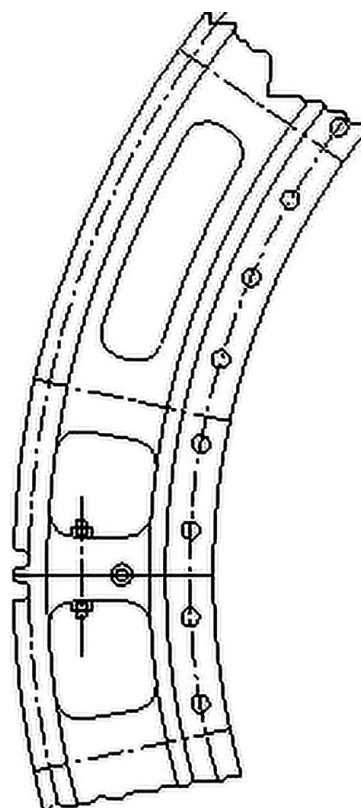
Additionally weakened gear by decreasing the rim thickness due to connecting bolts (position 2 from Fig. 7)
